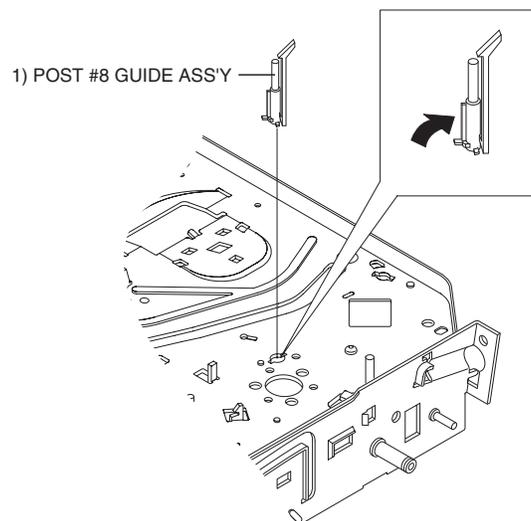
Post #8 Guide Ass'y Removal
